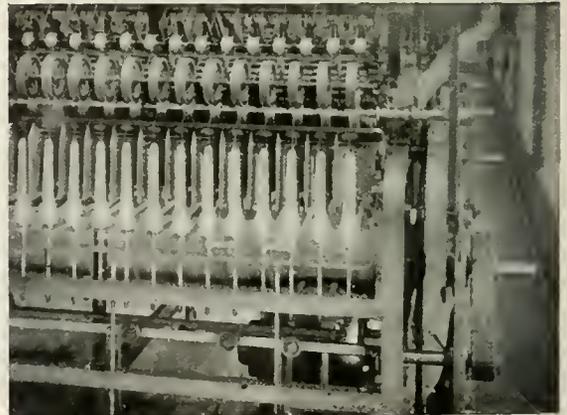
Chain Drive with Motor Installed Under Spinning Frame. Arlington Mills, Lawrence, Mass.
